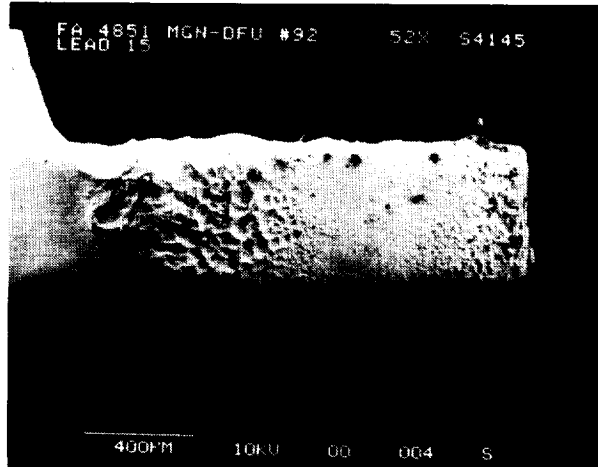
SEM photographs showing good solder fracture properties of foot and pad from failed (pin 15 and 16) solder joints
